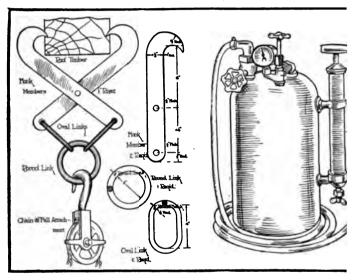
Outlining Construction of Supporting Member for Cl Attachment and Appliance for Cleaning Machine Parts Gasoline Spray.
